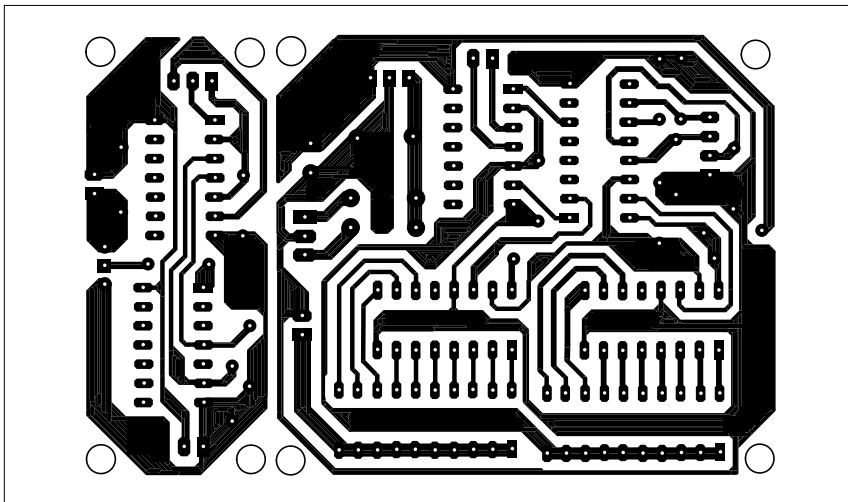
Actual-size, single-side PCB for the computersied electronic lock
